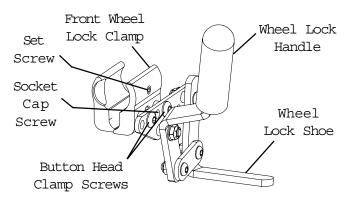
INSTALLING NEW WHEEL LOCK (LEFT WHEEL LOCK FOR 20" REAR WHEEL IS SHOWN)
